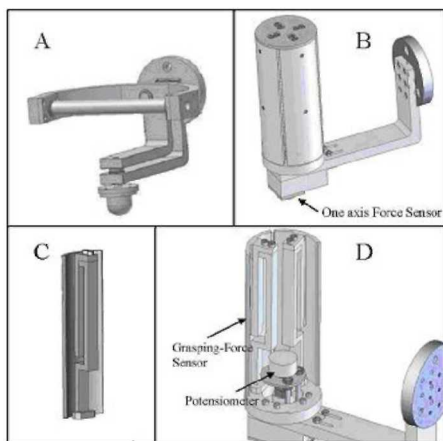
Sensor grip device: (A) Former handle (passive gimbal), (B) Current handle (sensor grip), (C) A part of grip force sensor, (D) inner mechanism of the grip device
